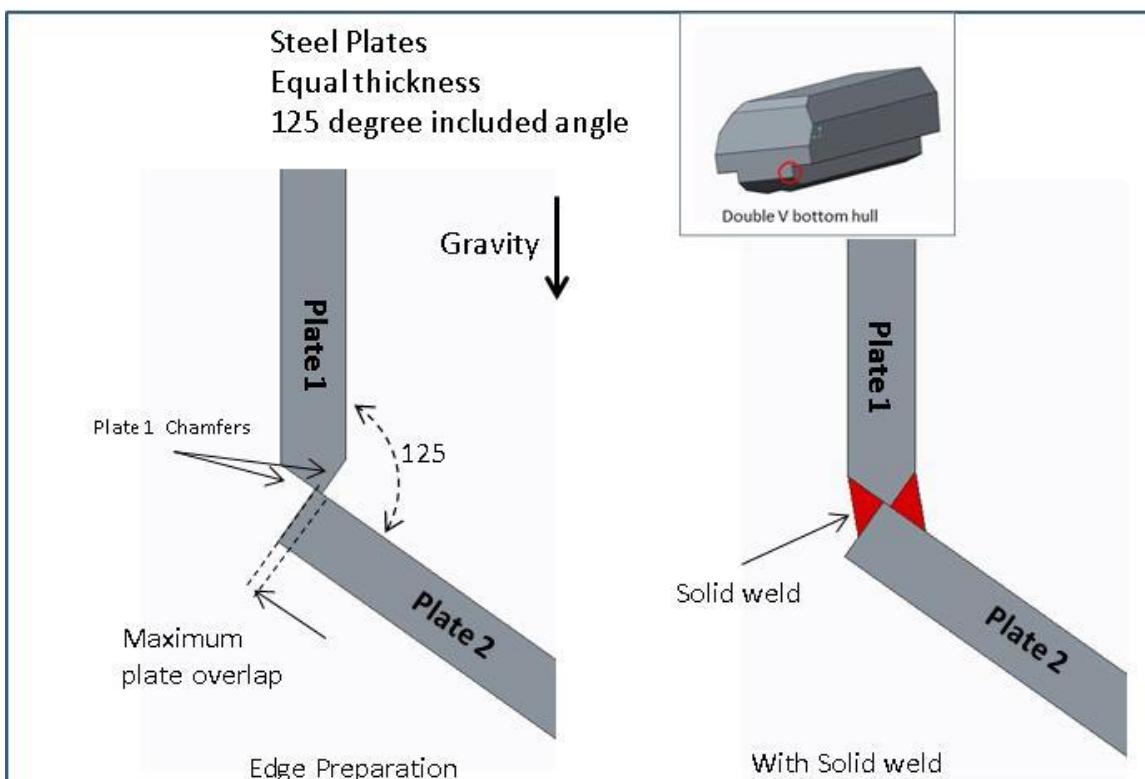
Edge Prep and Solid Weld Example 2
